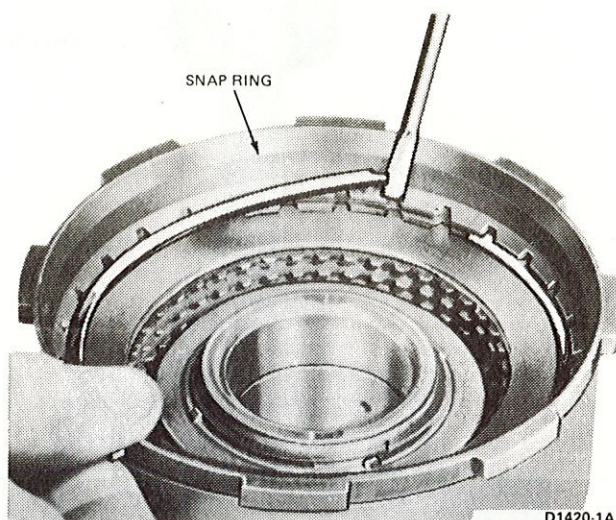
Removing or Installing Reverse-High Clutch Pressure Plate Snap Ring
